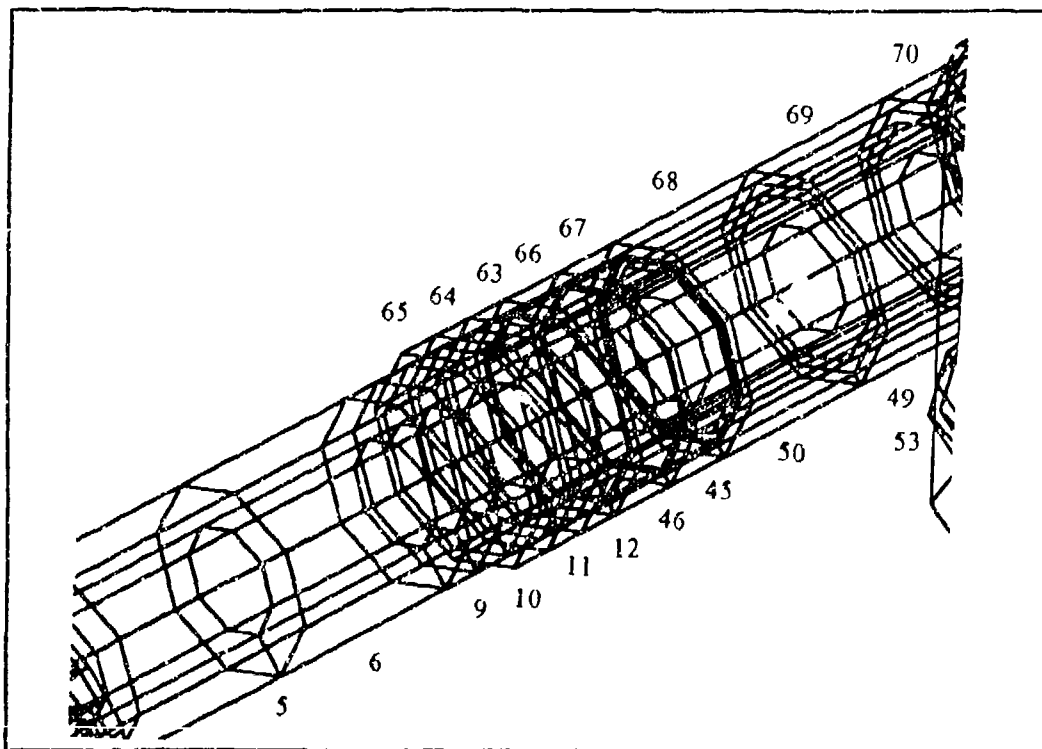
Attachment Point of Right Gear Leg and Aft Crosstube
